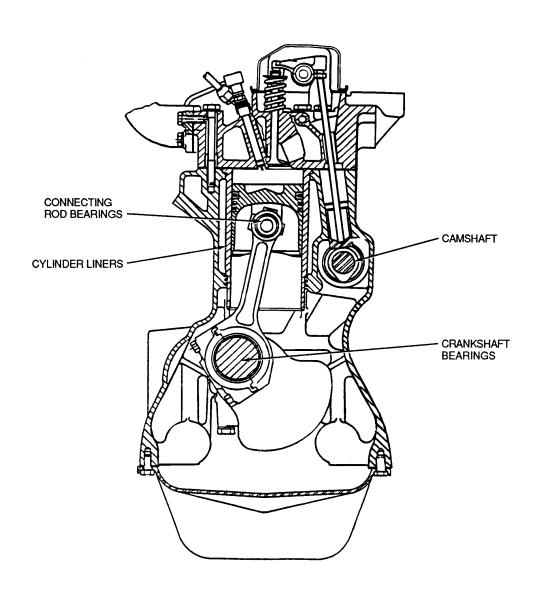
John Deere 6059T-DW-04 5.9 Liter Engine - Sectional View
